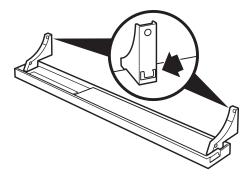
Identifying the Mounting Tabs of the Bezel Hinges
